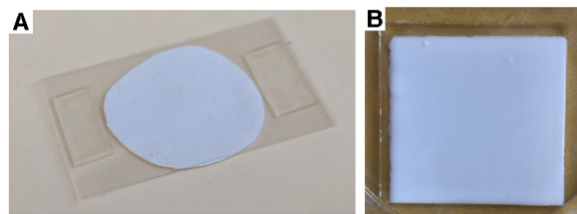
Example images of cast and printed composite samples. Composite sample is shown in the slide assembly used to cast samples (A). Composite sample is shown on glass substrate after 3D printing (B).
